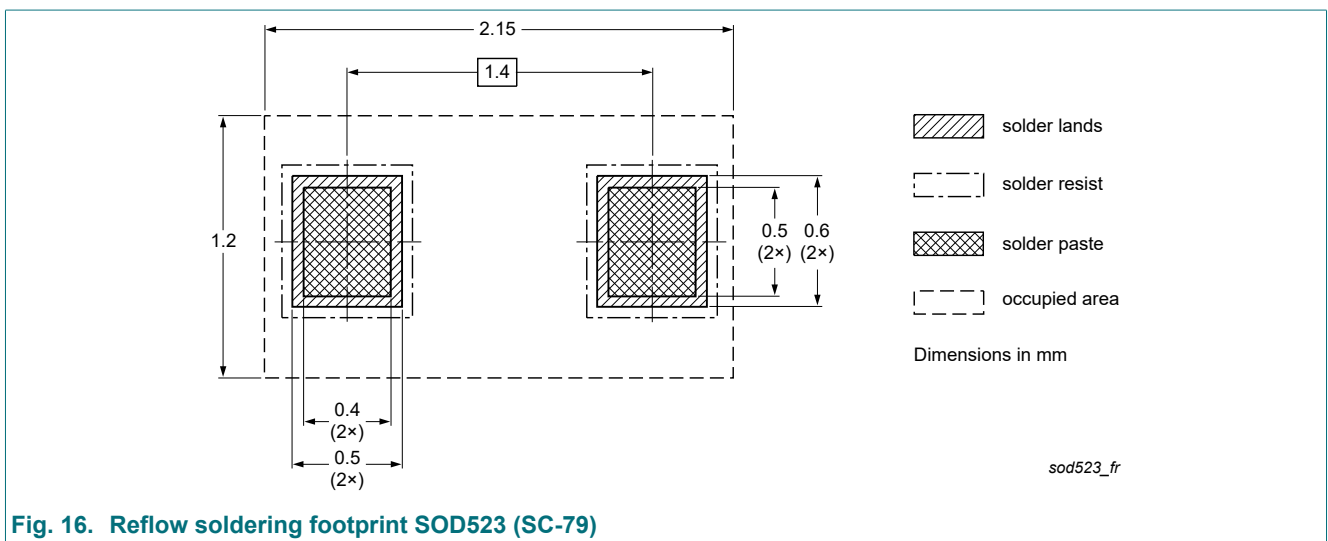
Reflow soldering footprint SOD523 (SC-79)
